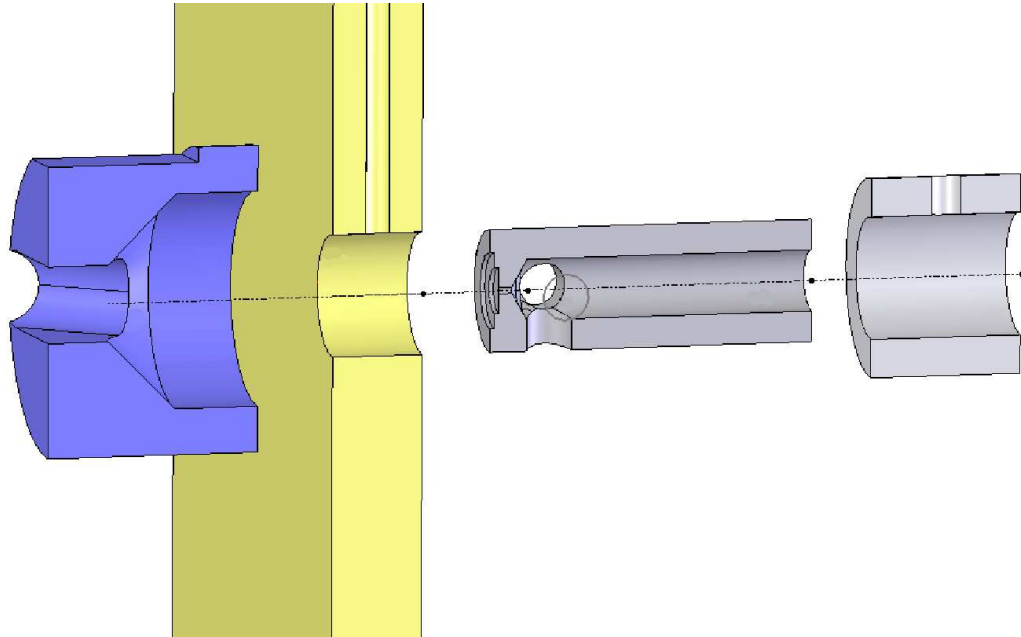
An exploded view of the upgraded sample mount. Components 1a and 1b form the sample sheath, 2 is the sample holder, and 3 is the collar for the sample holder.
